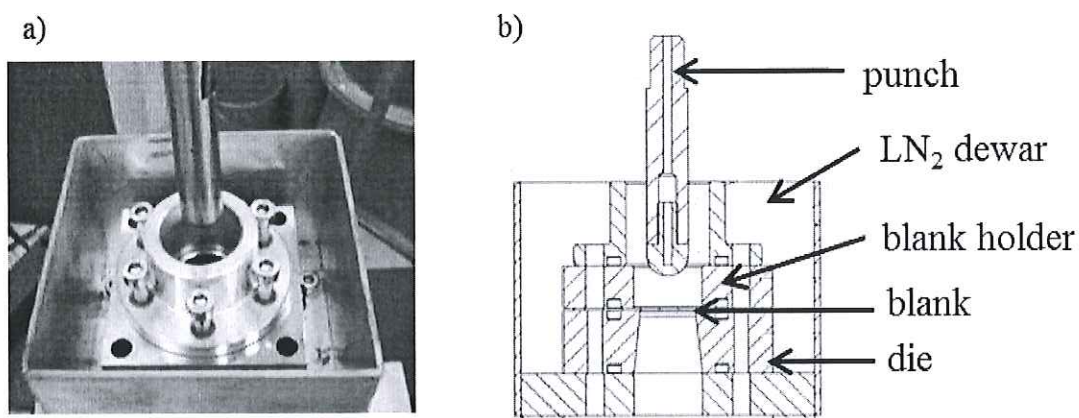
a) Tensile test equipment; b) cross-sectional view of tensile test set-up.
